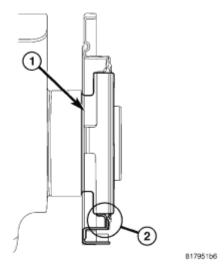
Rear Seal Installed Courtesy of CHRYSLER LLC
